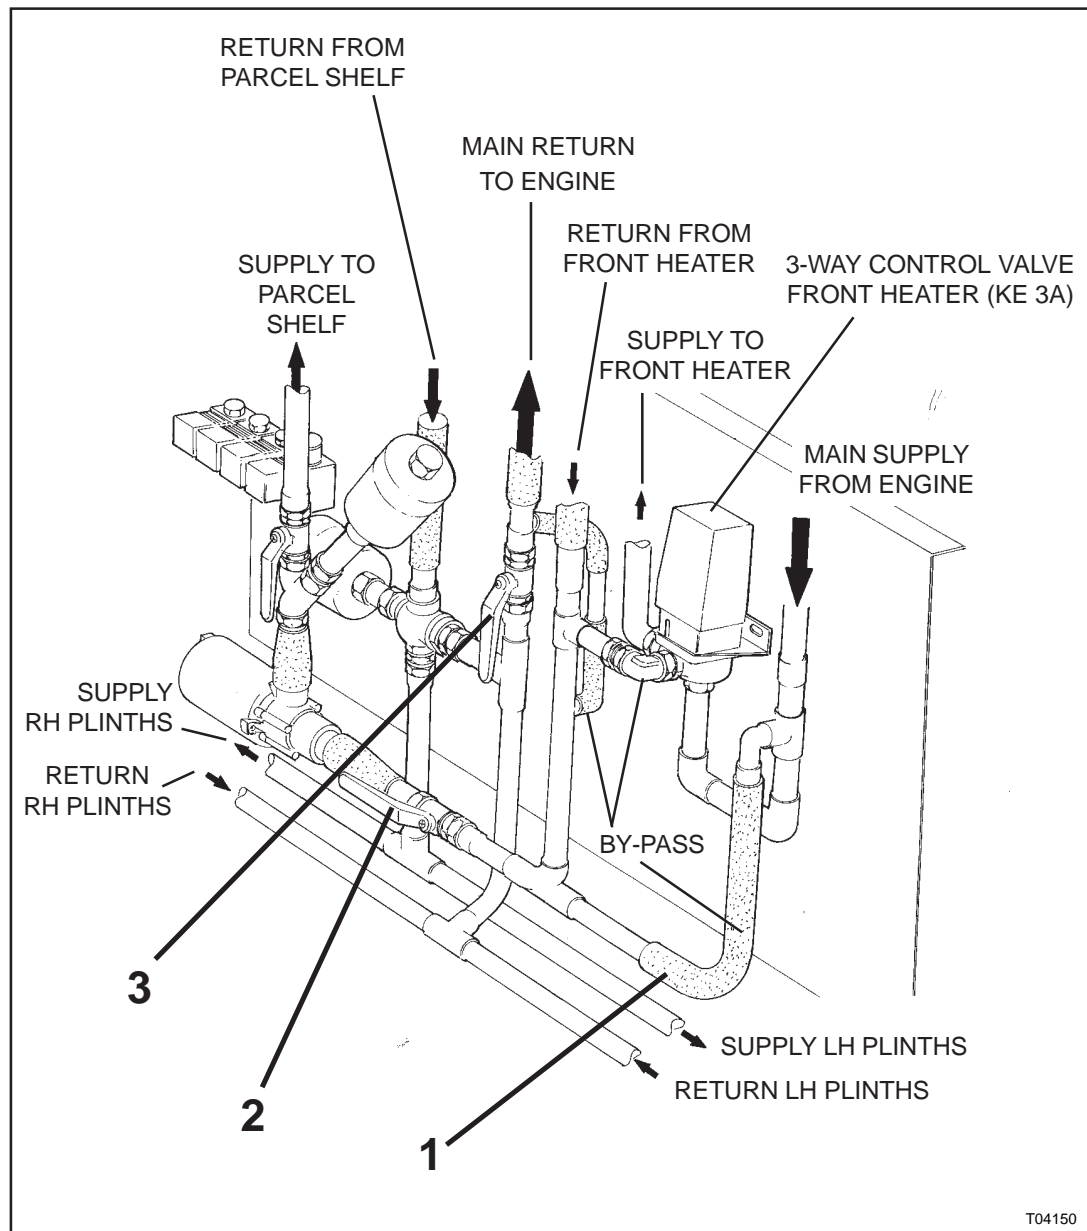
Heating system valve and pump panel. Engine main supply and return valves in the "open" position.
